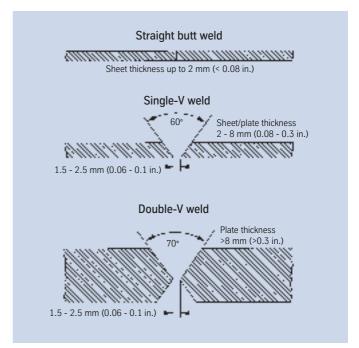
Edge preparation for GTAW of Pernifer 36.
